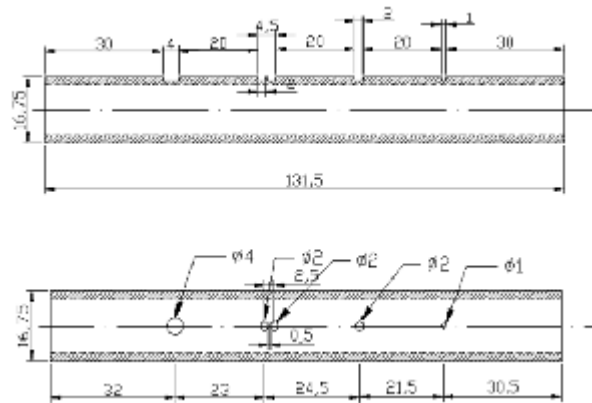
Flat-bottomed holes in the 6 inch pipe.
